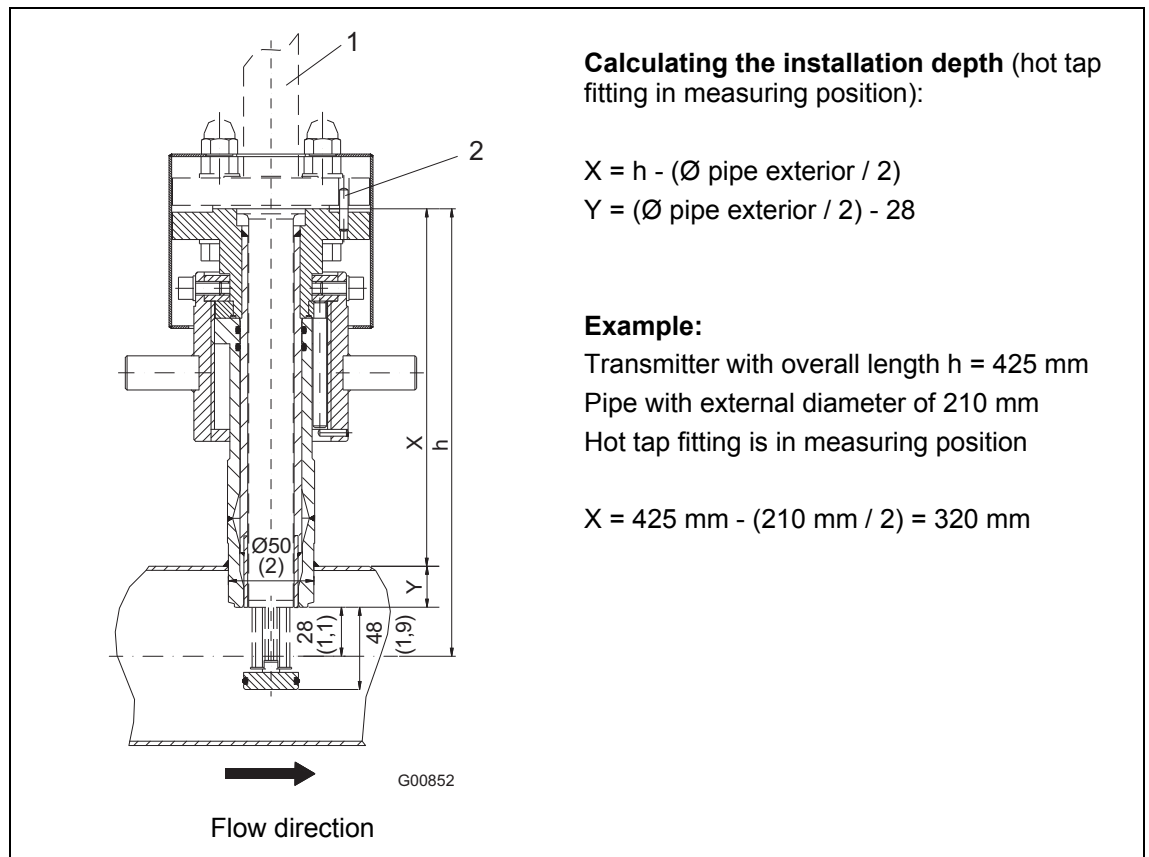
Dimensions in mm (inches) hot tap fitting in measuring position
